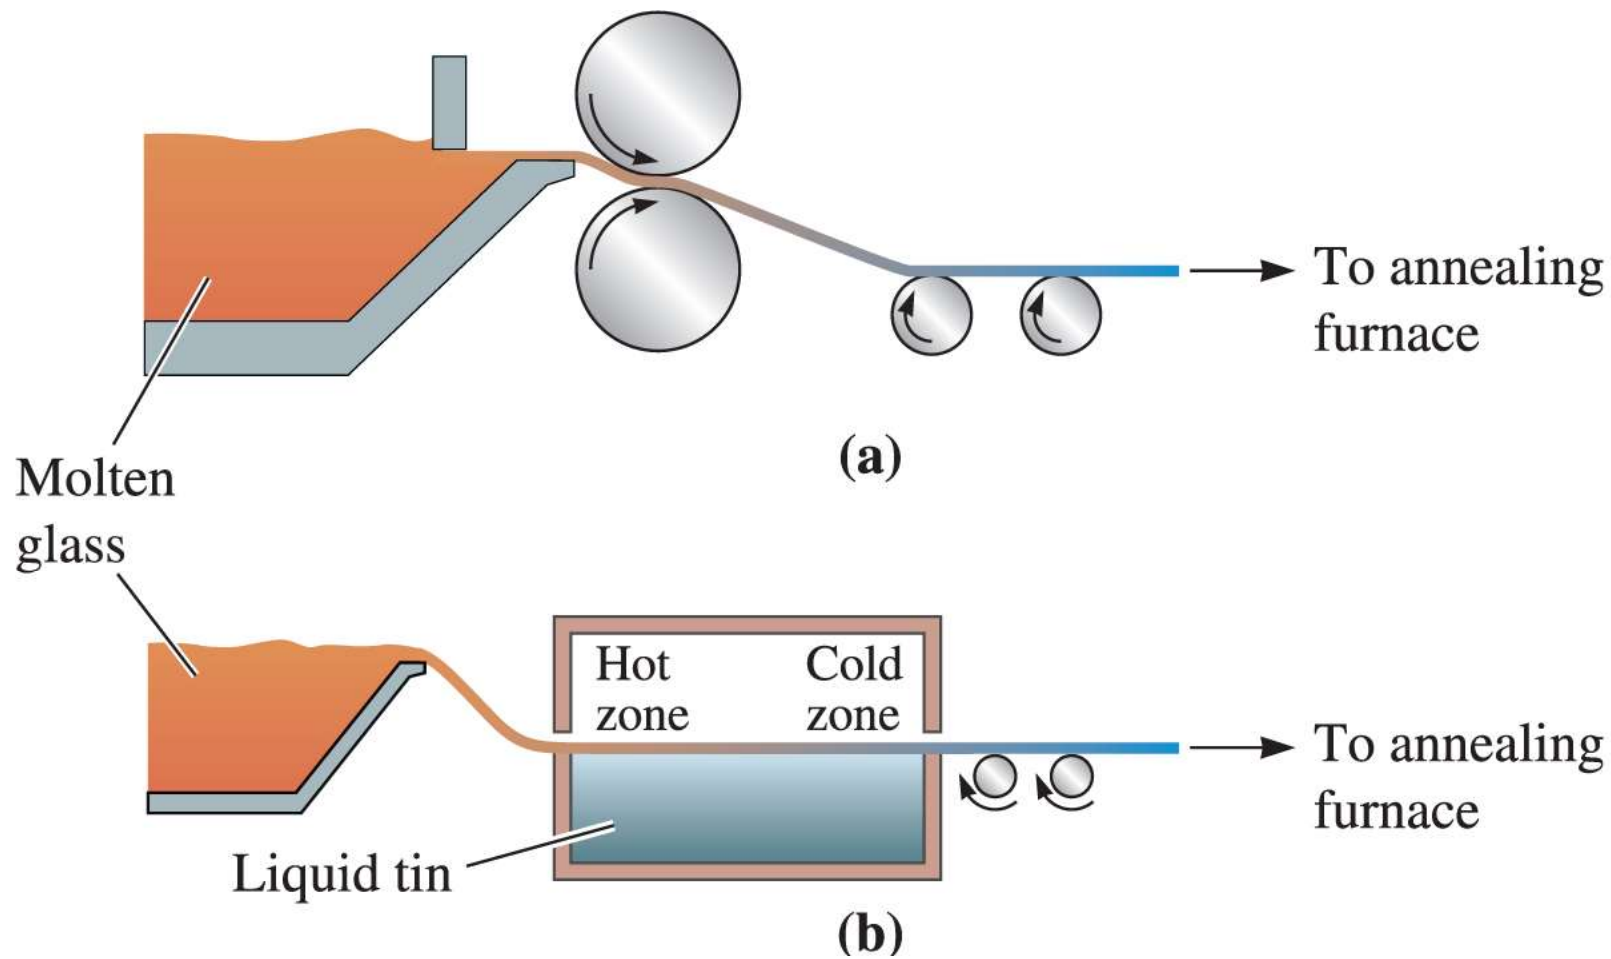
Techniques for manufacturing sheet and plate glass: (a) rolling and (b) floating the glass on molten tin.
